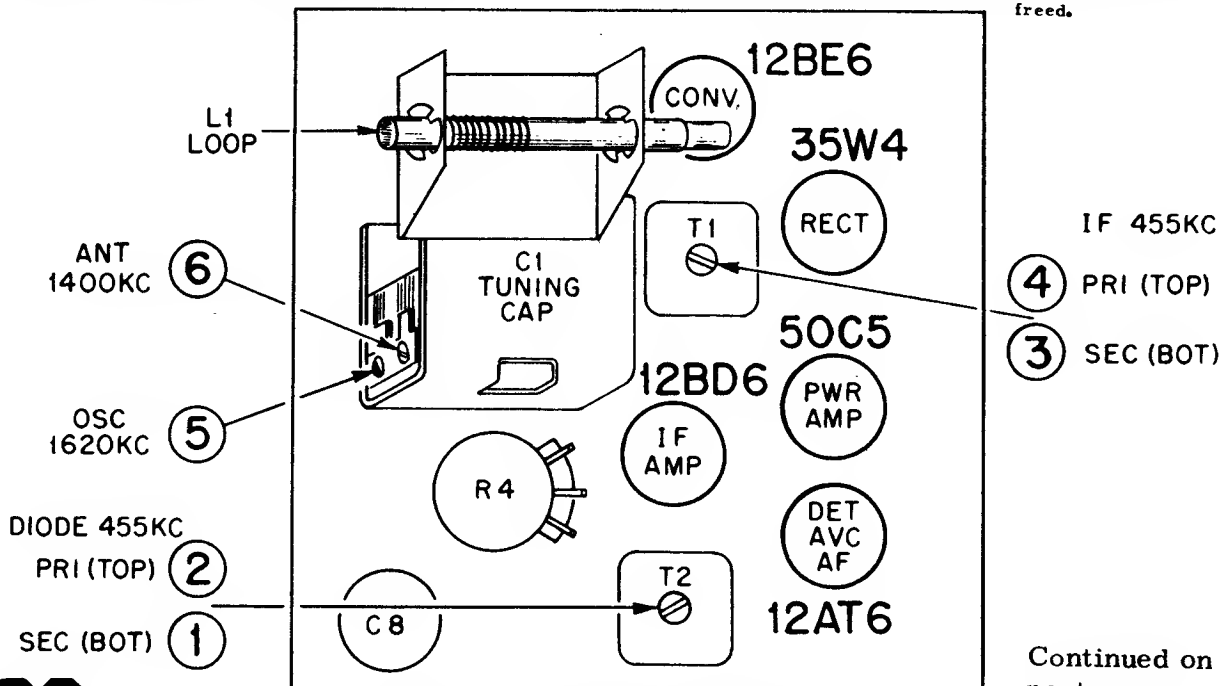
TUBE AND TRIMMER LOCATIONS (LATE MODEL)
